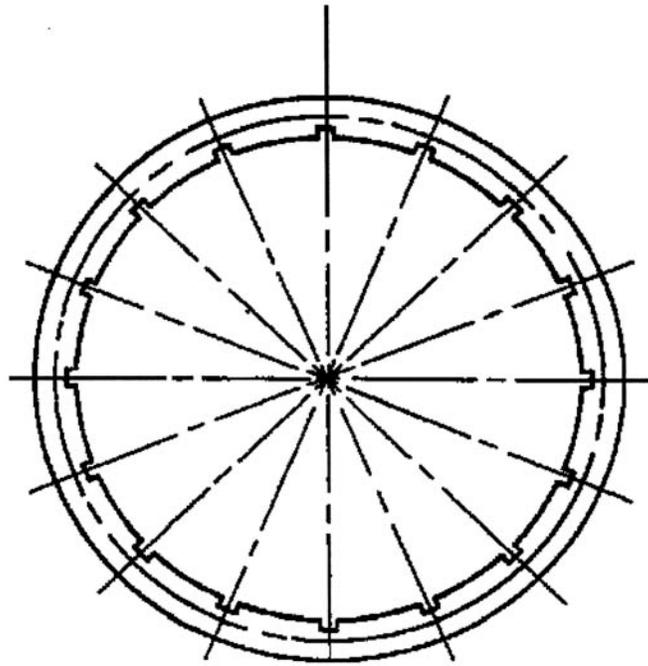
End view of class II and class IV cylindrical bearing showing location of saw cuts.
